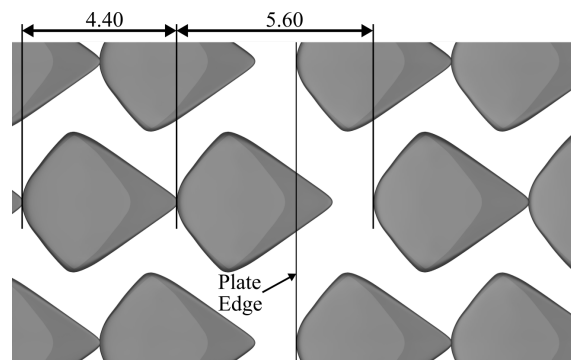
Array dimensions at the joint between two plates (mm).
